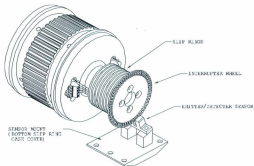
Blade position/propeller shaft speed sensor setup.
